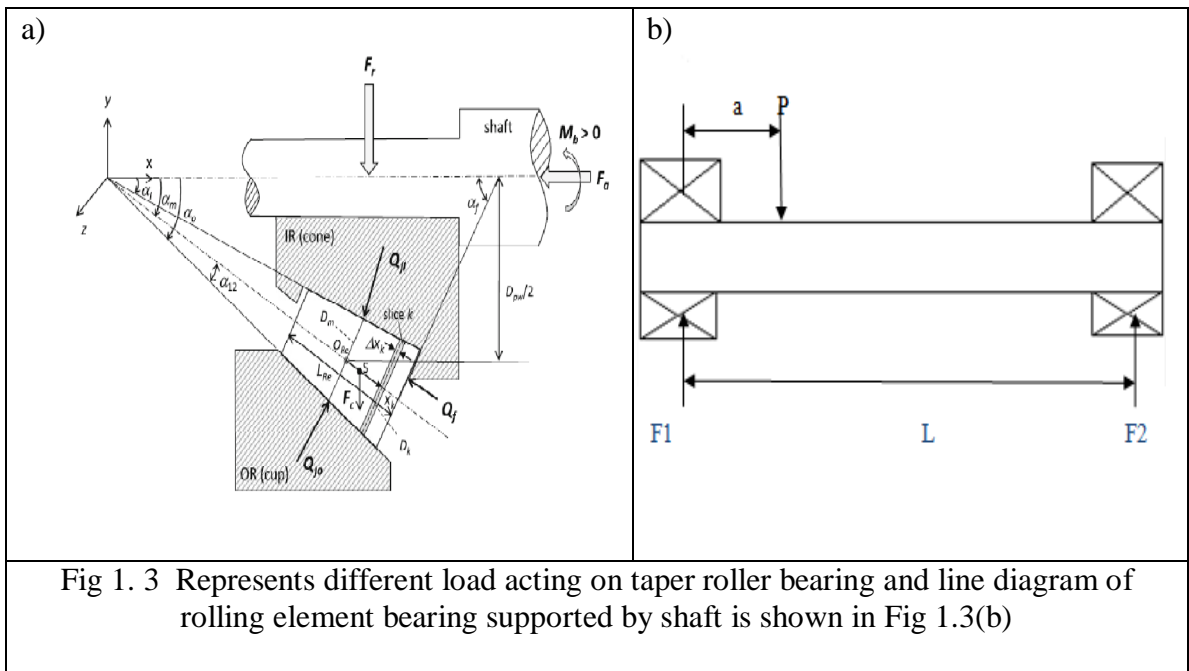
3 Represents different load acting on taper roller bearing and line diagram of rolling element bearing supported by shaft is shown in Fig 1.3(b)
